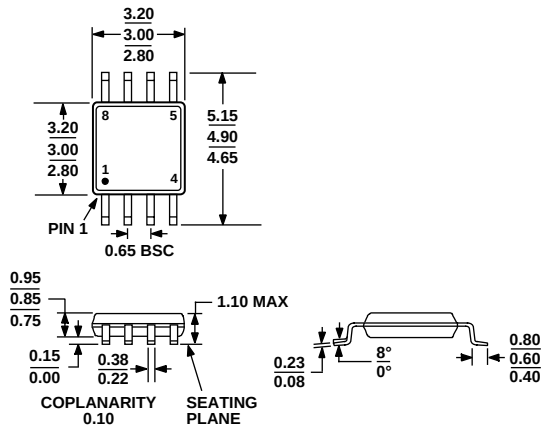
8-Lead Mini Small Outline Package [MSOP]
